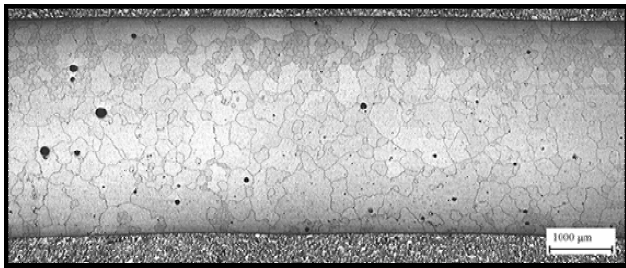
Longitudinal sections through laser welds without filler material on spray cast material, slightly etched. Sheet thickness is 3 mm.
